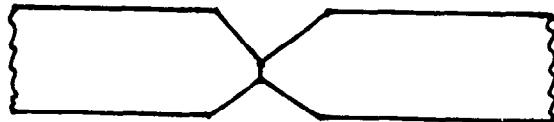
PLATE EDGE PREPARATION FOR BUTT WELDS
